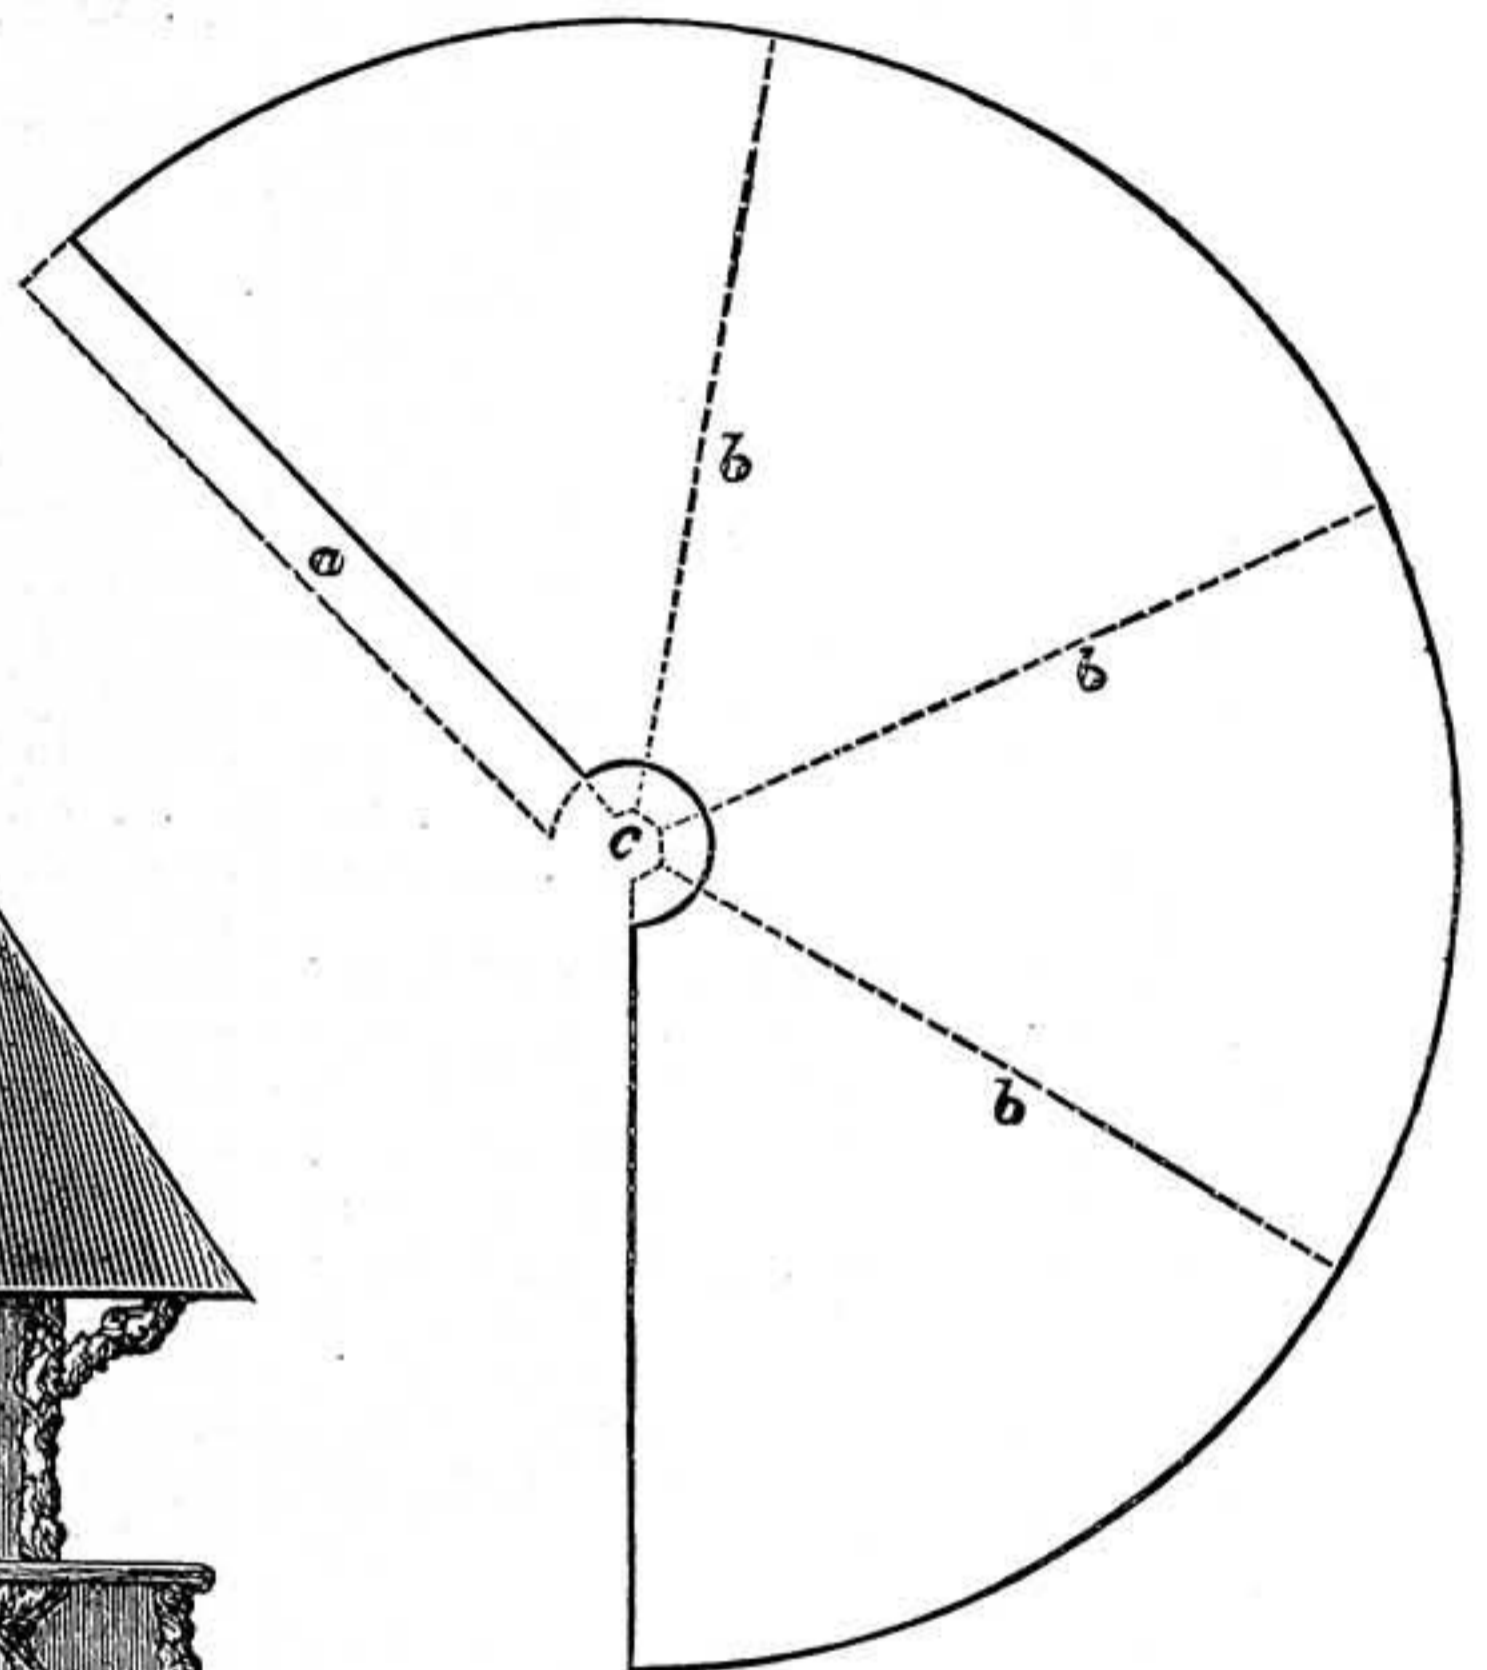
Setting out Metal Roof. (Scale, ½ in. to 1 ft.)
